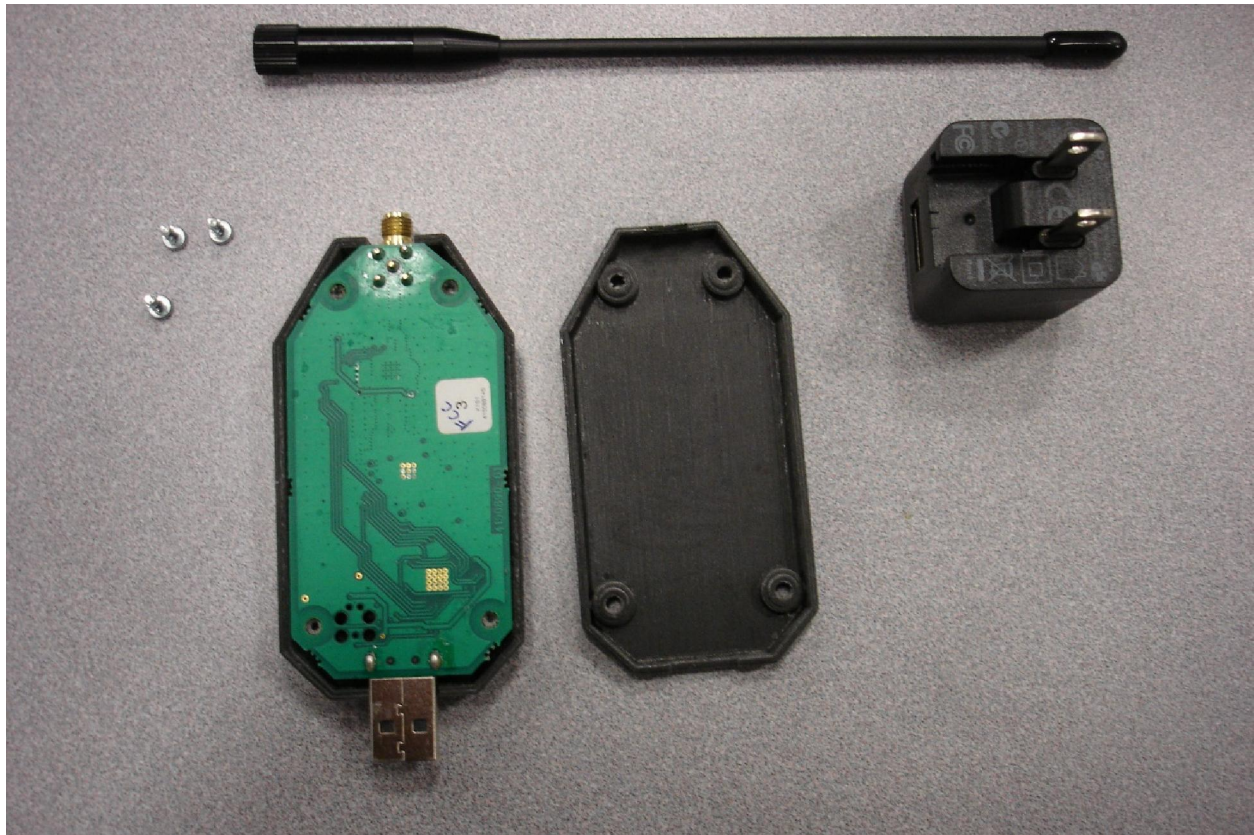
Internal Photo of Range Extender with PCB assembly bottom shown (flipped onto enclosure top).
